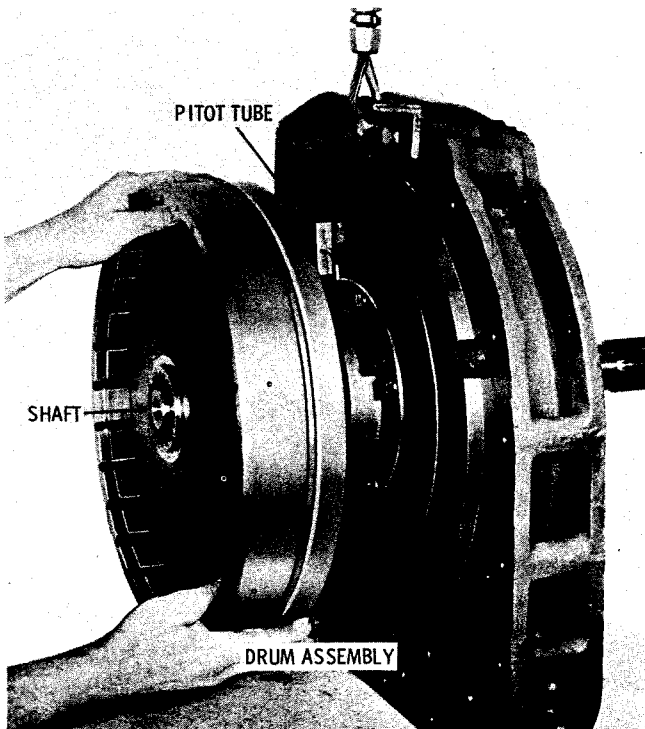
Installing low-splitter clutch drum assembly (CBT, CLBT, VCLBT)
